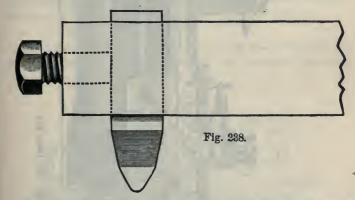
is a boring tool, used in the lathe for enlarging holes cored or drilled; when the size of the hole permits the tool is made of large size; and when the hole is deep and will allow it, a strong bar, having a cutting-bit fixed in a slot, or hole with a set screw, is used, as shown in fig. 238.
